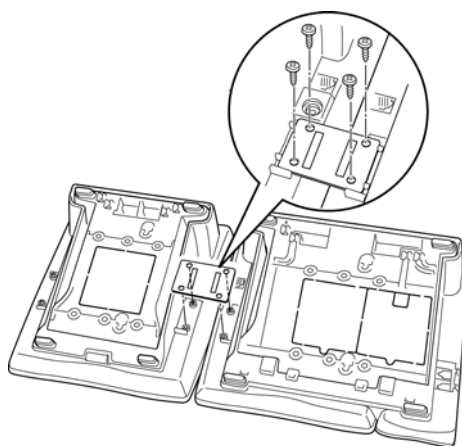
Connecting the DCR Console to a Multiline Terminal
